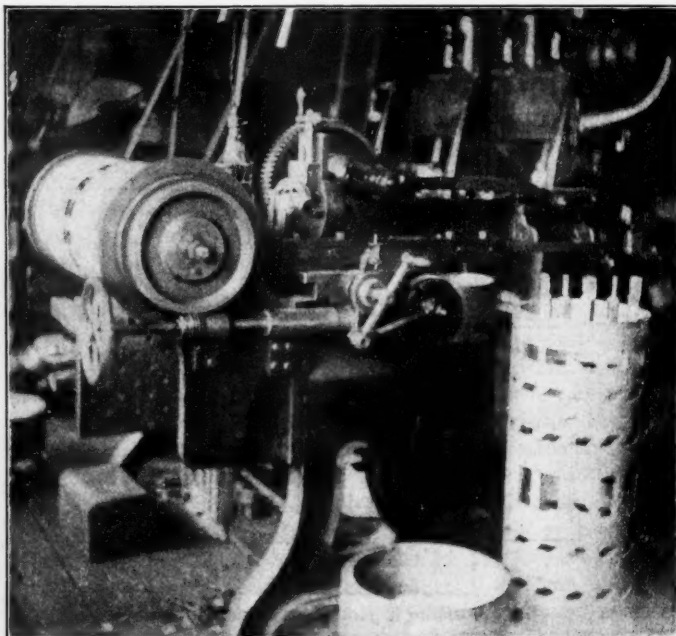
Shaper Using Special Tool on Valve Bushing.
